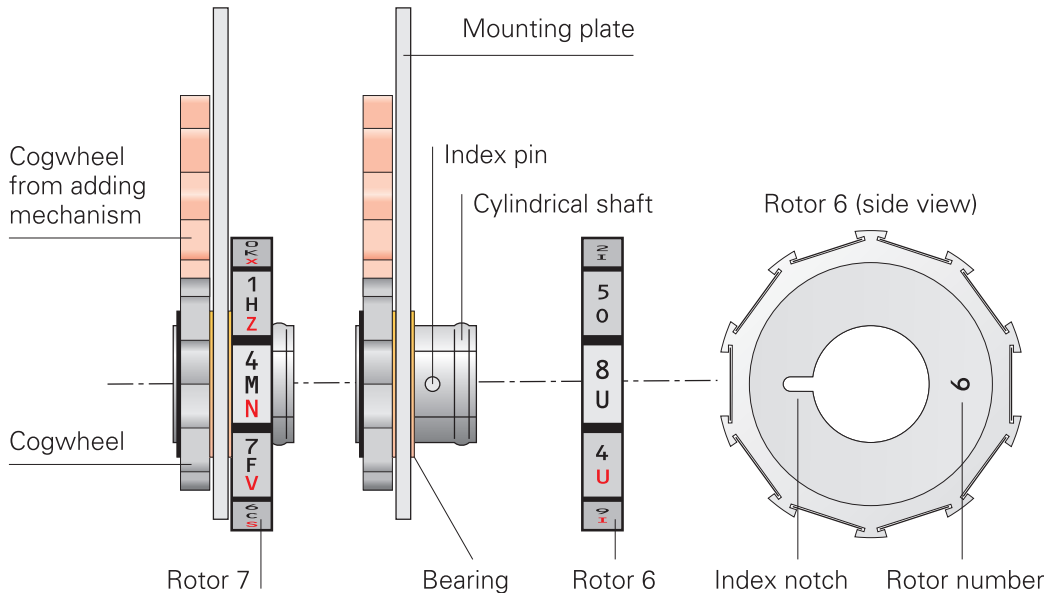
Top view of the rotor assembly, showing rotors 7 and 6 side-by-side
